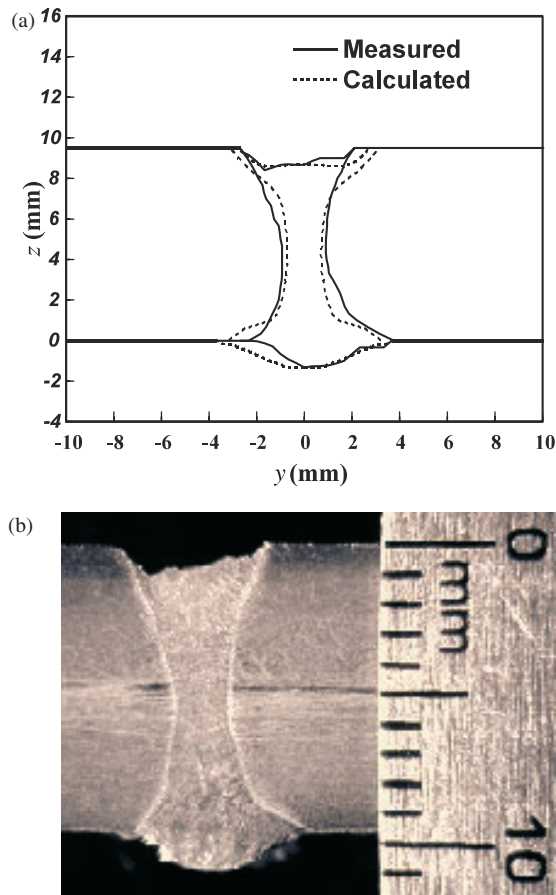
The comparison of measured and predicted keyhole double-sided arc butt weld on a 9.5 mm ($\frac{3}{8}$ inch) plate. Position, flat; welding current, 67 A; travel speed, 1.3 mm s^{-1} ; filler metal, none. (a) The measured and predicted DSAW weld geometry. (b) Macro-photography of DSAW weld.
